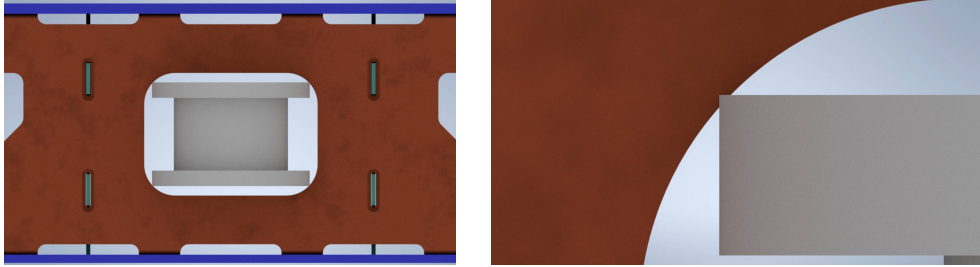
Largest part of the L-22D vacuum can, centered in front of the largest available hole of the optical table honey-comb structure. The left drawing shows the whole part of the can, the right drawing shows a zoom into the upper left corner. It is apparent that only a small cutout is required to fit the part through the hole.
